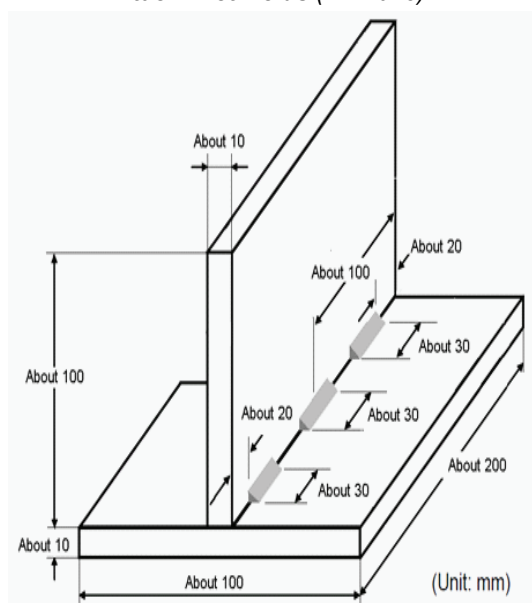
Dimensions and types of test assembly for tack fillet welds (1/1/2018)
